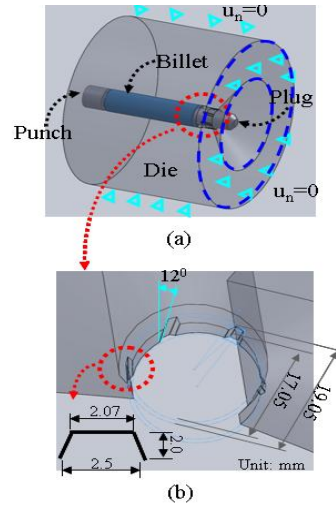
(a) Constraint conditions on the outer surface of die, and (b) detailed profile of spiral groove engraved on the inner surface of die
